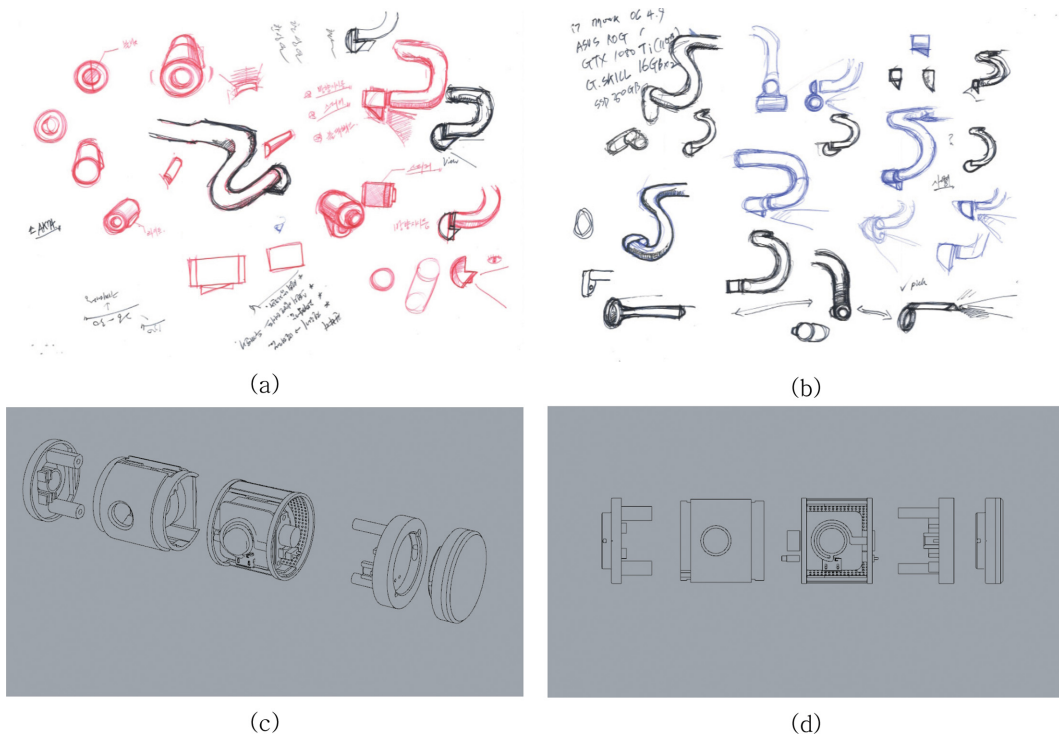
Drawing of module-type bicycle accessory sketch (a, b) and blueprint (c (perspective view), d (front view)).
